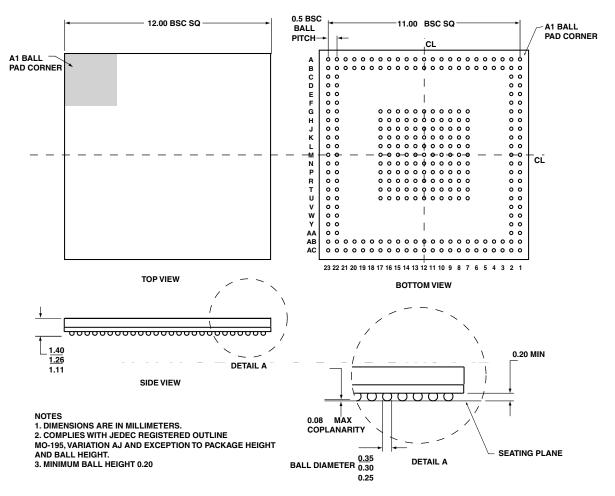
289-Ball CSP_BGA (BC-289-2)
